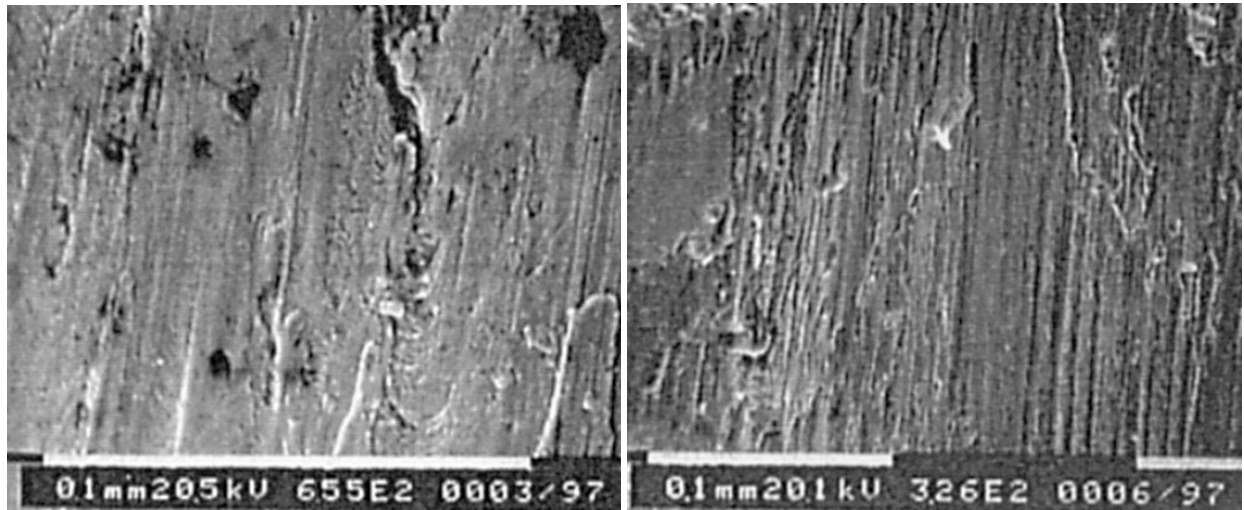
Close-up view of the flank faces two different carbide cutting tools (Jawaid et al., 1999).
